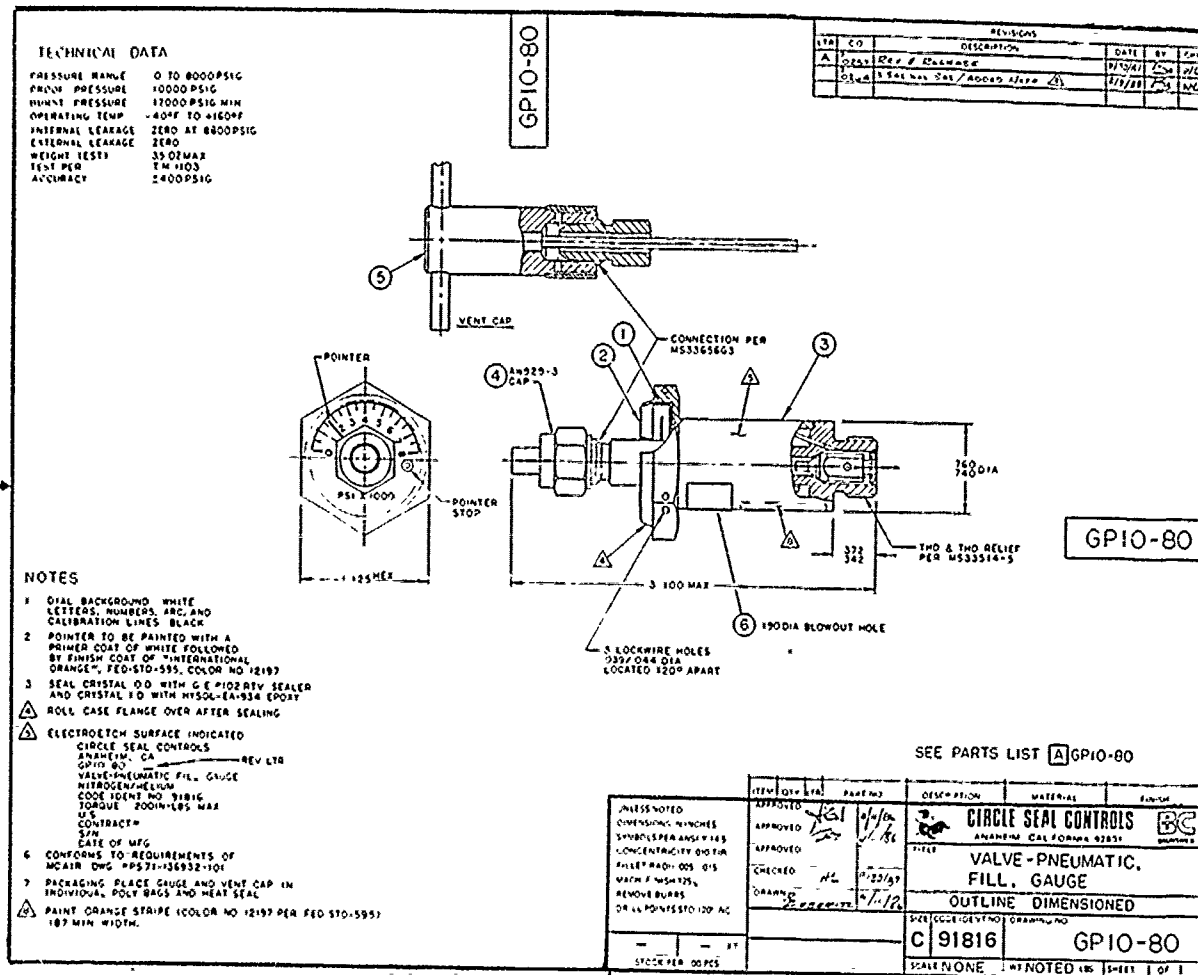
Circle Seal - Pneumatic Fill Gauge Outline/Detail Drawing
